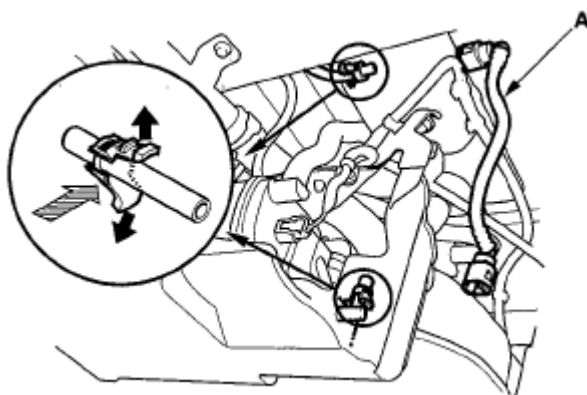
Connecting Fuel Line/Quick-Connect Fitting Assembly
